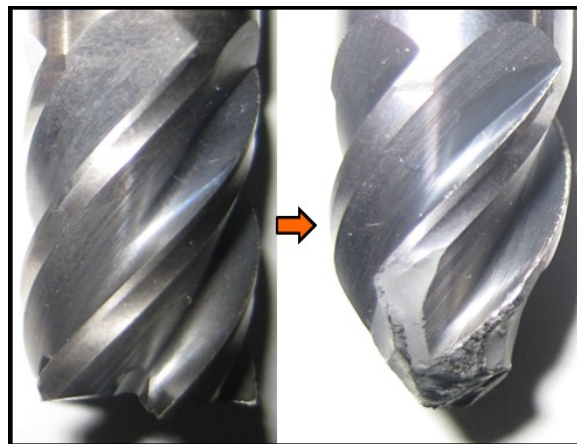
Another catastrophically failed solid-carbide end mill that was used for milling Ti-6Al-4V. The gross tool failure was predominantly due to the high-temperature welding and adhesion of the tool to the workpiece material, leading to brittle fracture away from the cutting edge and far into the tool body – this is evident from absence of visual high-temperature damage on the failed tool (5-flute,  $\phi 0.5''$  center-cutting end-mill).
